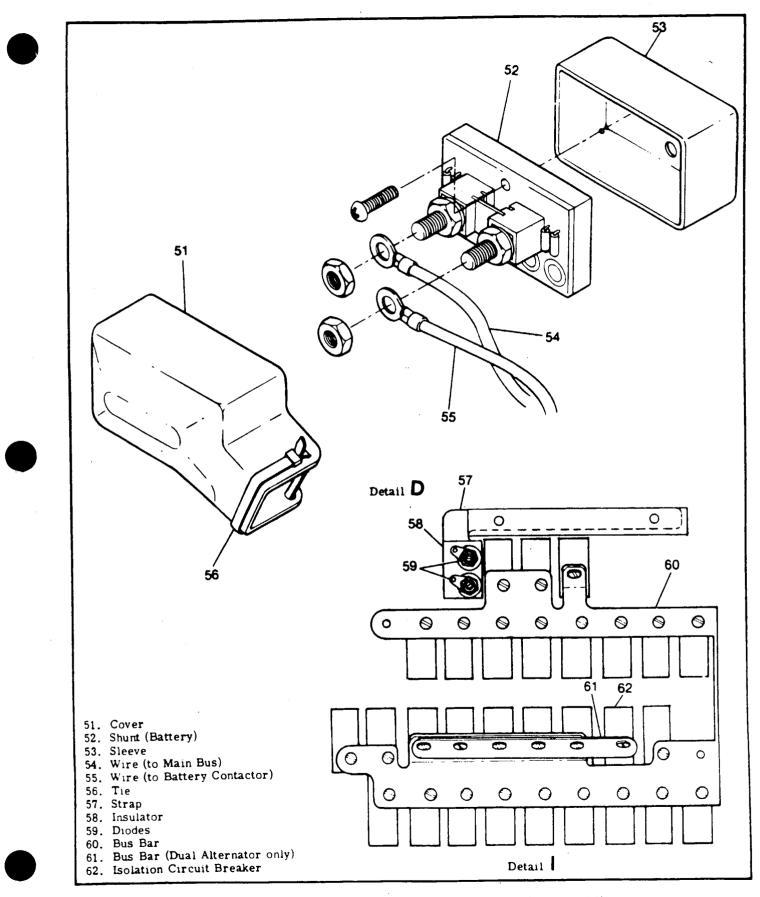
B. Dual Alternator System Installation (Sheet 6 of 8)
